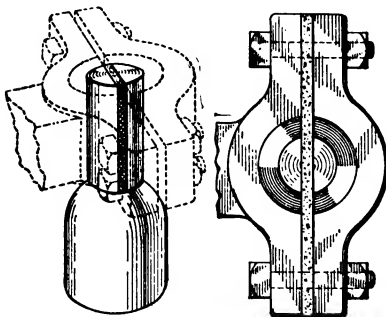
Wooden Core for Babbitting Connecting-Rod Bearings
